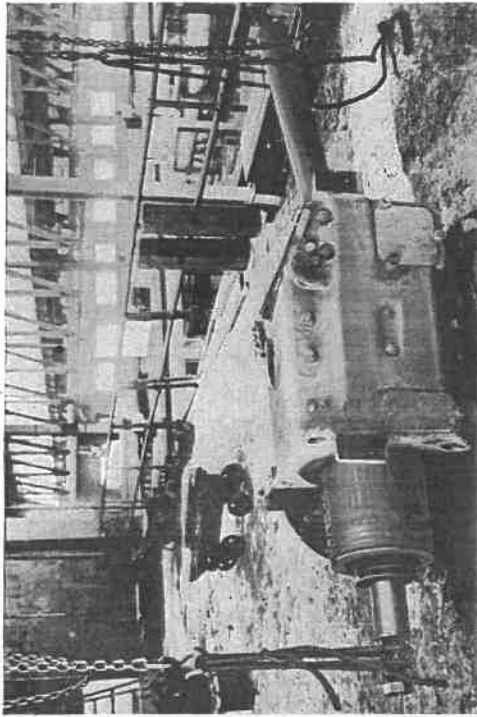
One end of armature supported by a tube fitting over the armature shaft
